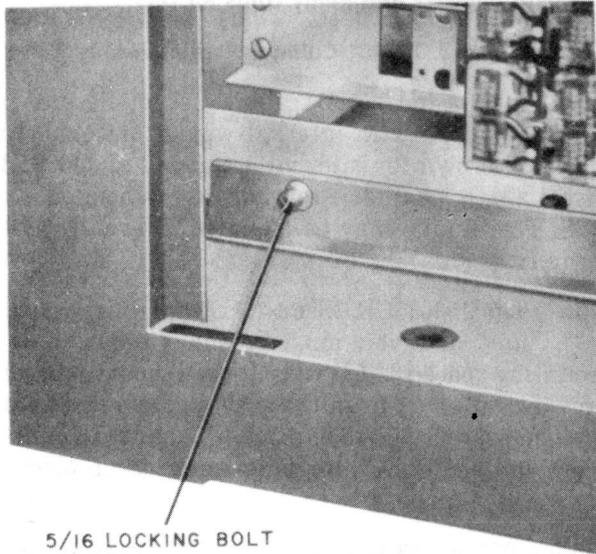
Locking Bolt in Position for Shipping (MD Cabinets)
